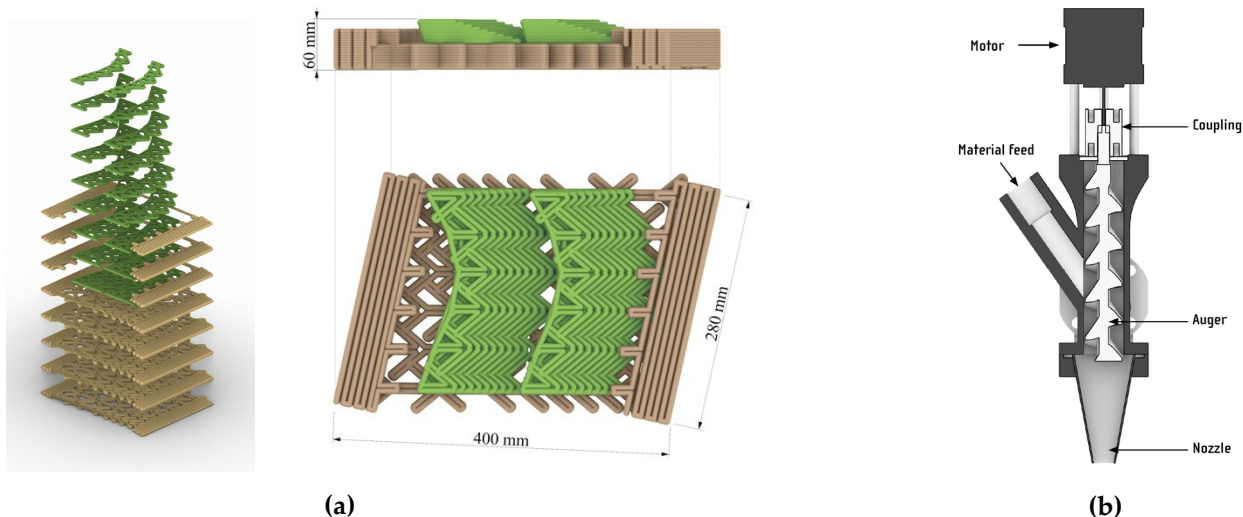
(a) Dimensions and toolpath of 3D-printed test geometry with two different paste materials, (b) section of extrusion printhead and nozzle
